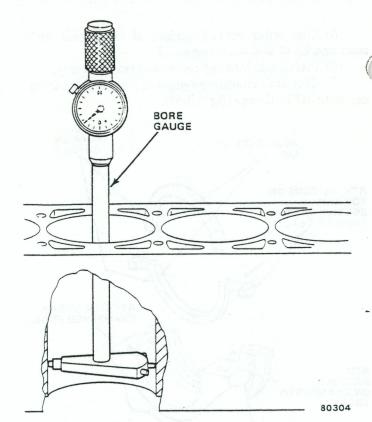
Measuring Cylinder Bore with Bore Gauge
